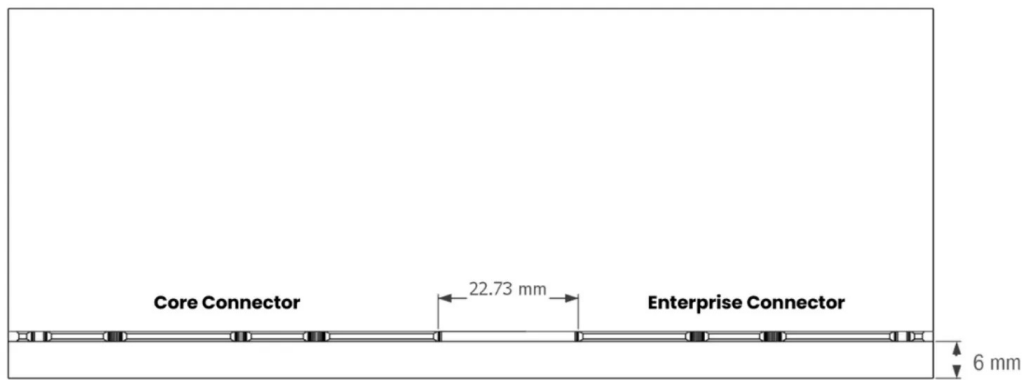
Core and Enterprise Plug Layout (Front View)
